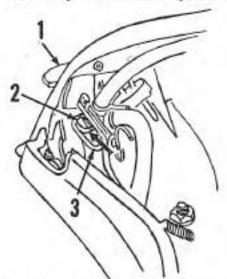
On early Fishing Scott models the fuel system bleeder valve is operated by the choke knob as shown. See text for details.
